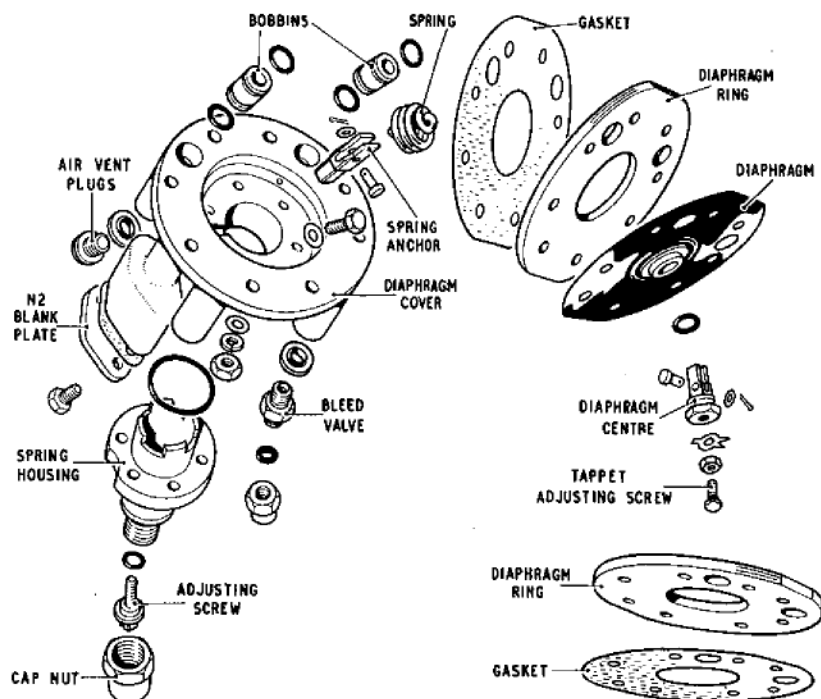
Exploded view of overspeed control assembly and attaching parts
